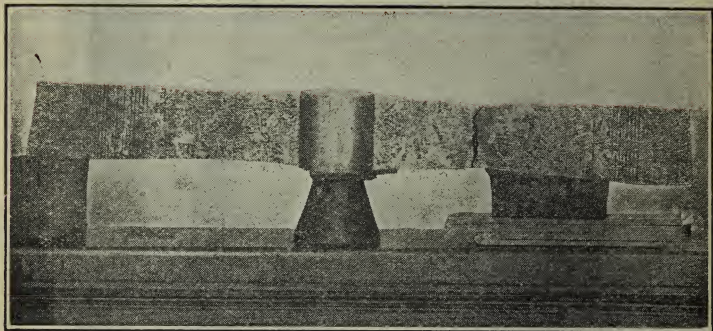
STEEL PLATE BROKEN IN TEST WITHOUT INJURY TO LOCK-BAR JOINT.
